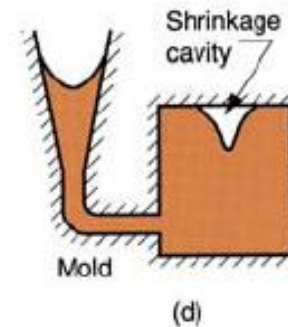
Some common defects in castings: (d) shrinkage cavity
